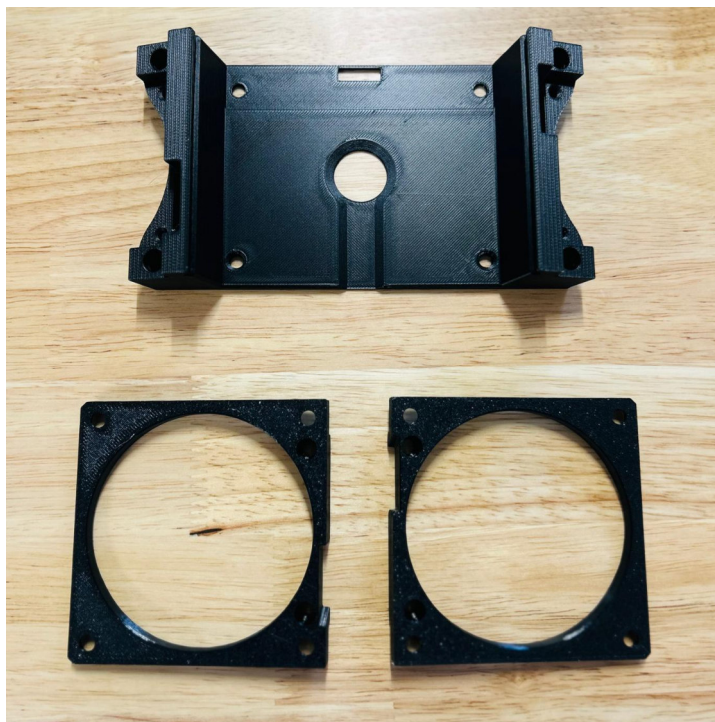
Associated assembly photos for Step 1 - View Prepared Subassemblies.
